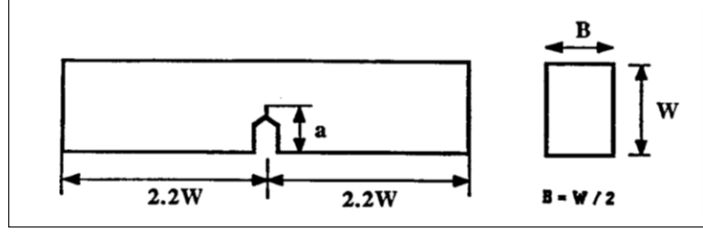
A schematic of a single edge notch beam specimen used in a three-point bend test. The crack length a should be such that $0.45 < a/w < 0.55$ [7].
